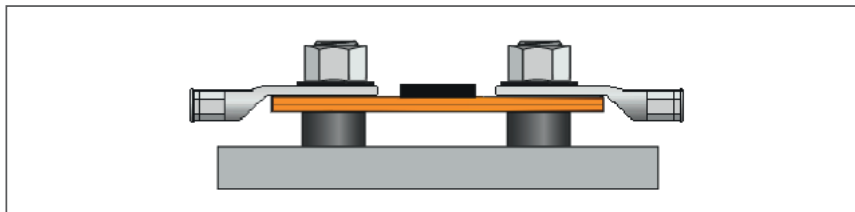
HV- power cables, fasten the ring terminals using the M8 nuts
